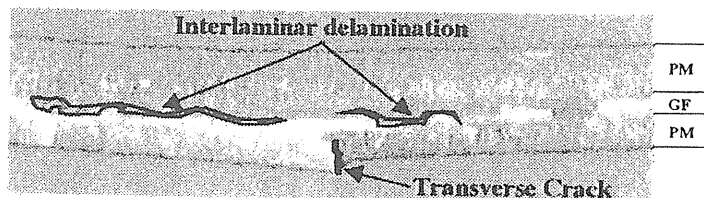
Fracture photograph in edge-wise direction of the GF-PM
